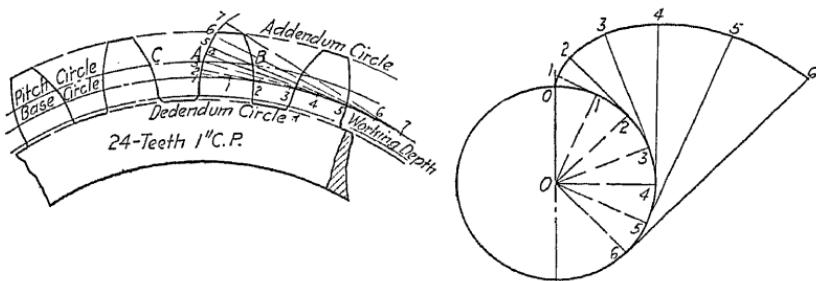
Exact method of drawing involute teeth. Method of drawing an involute on right.
